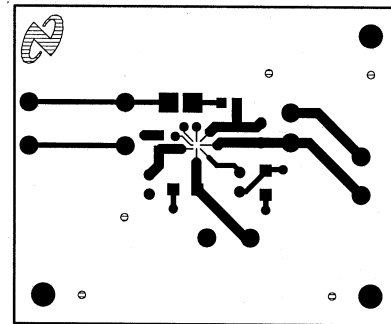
REFERENCE DESIGN BOARD and LAYOUT - DSBGA
